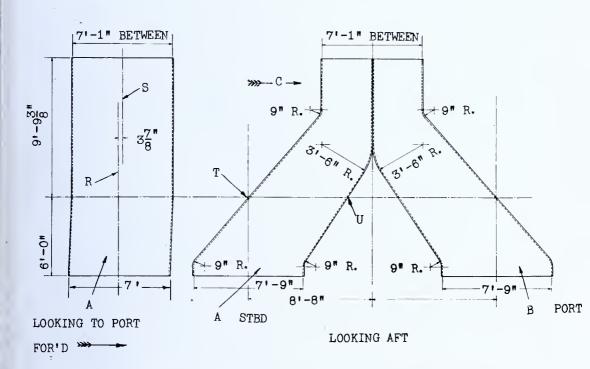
As the Blueprint Shows the Uptake (Some dimensions are omitted. See Drawing 241-880-1 for complete details)
